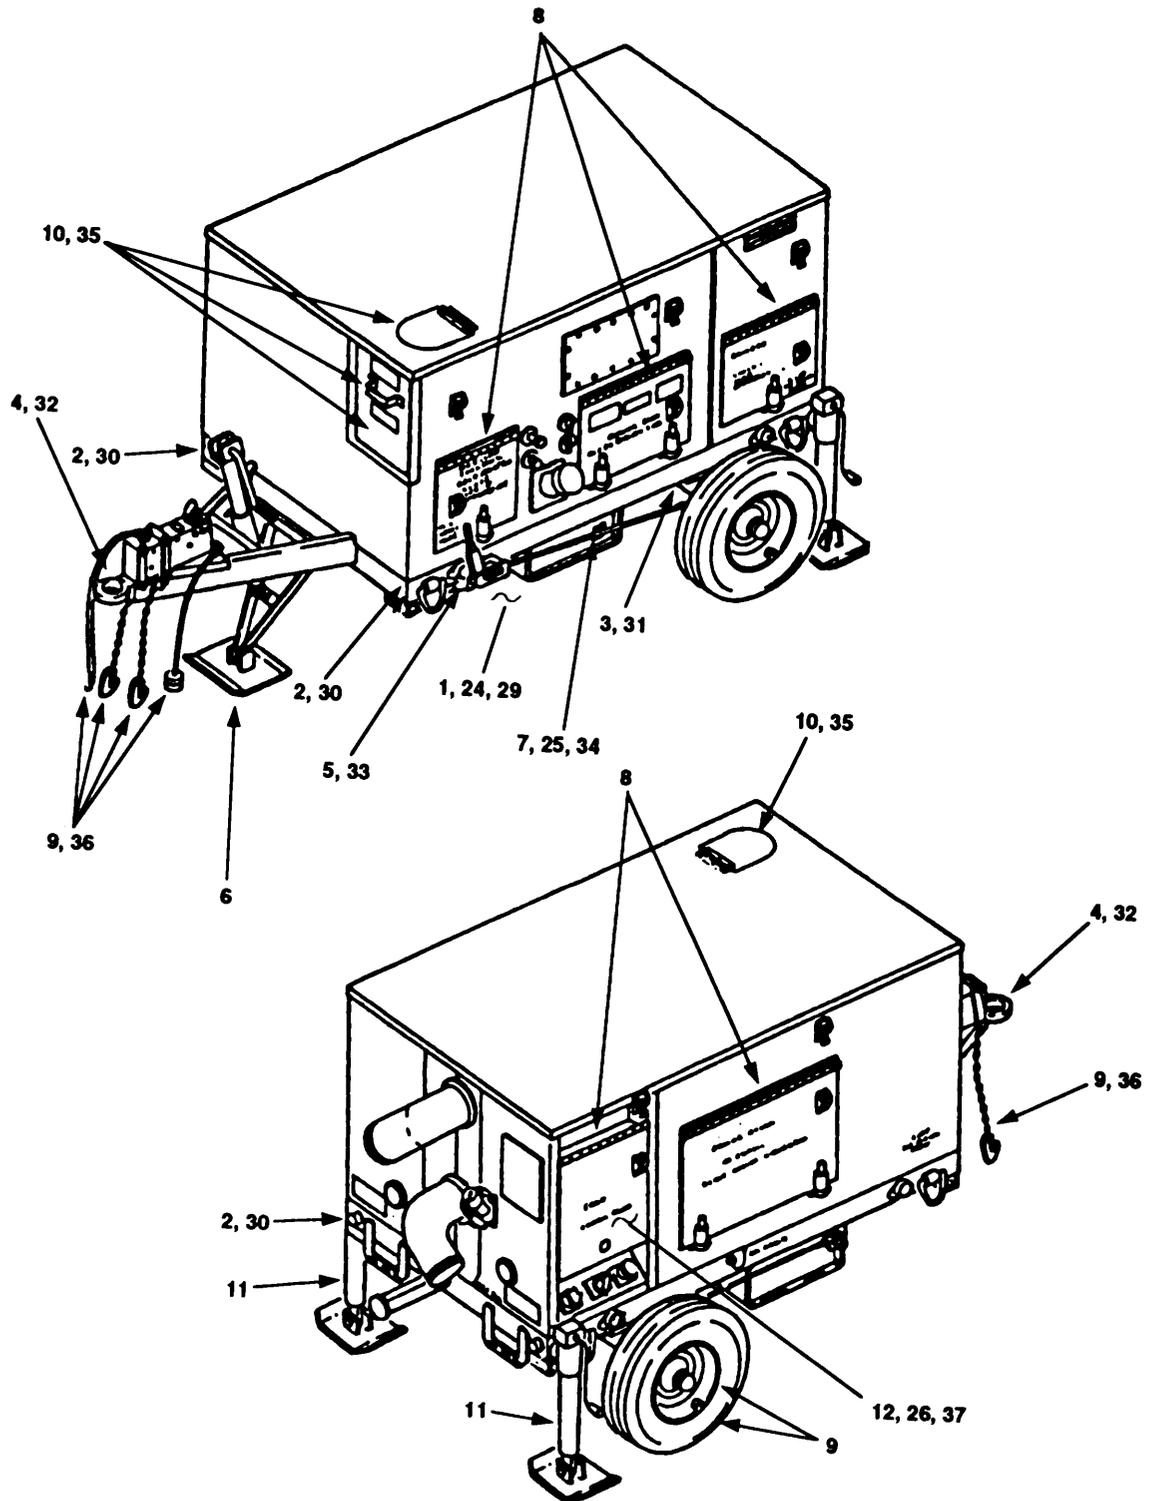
Pumping Assembly Model 609-C PMCS Routing Diagram (Sheet 1 of 2).
